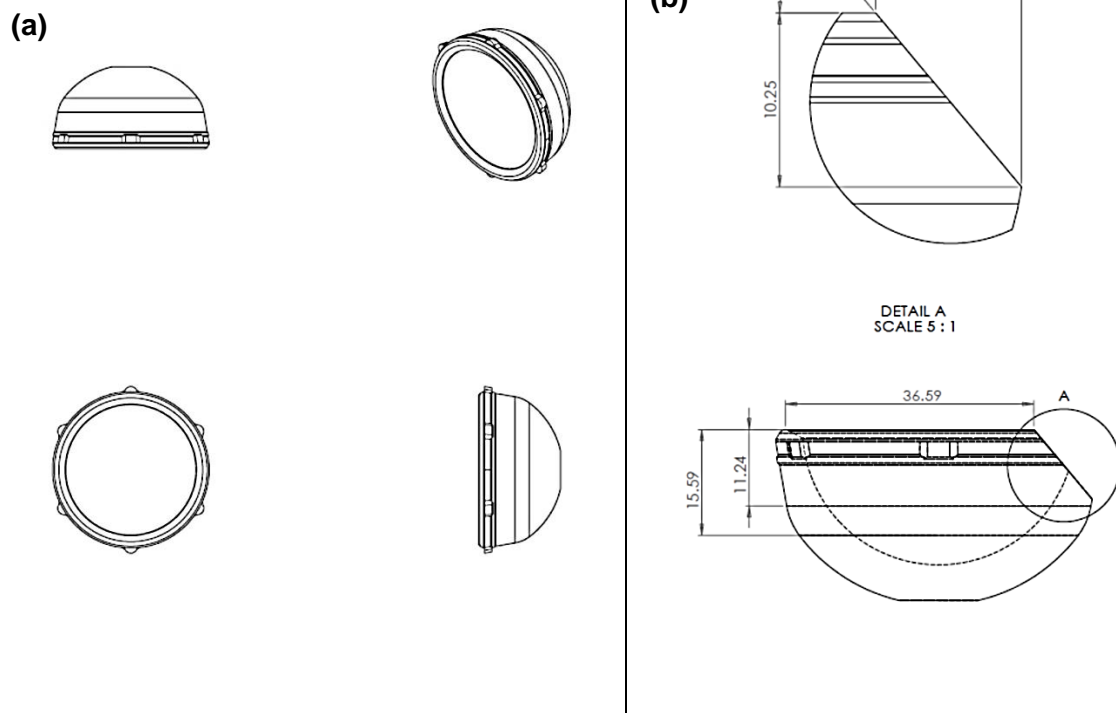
(a) Unmodified acetabular liner (b) Details showing sectioning features
